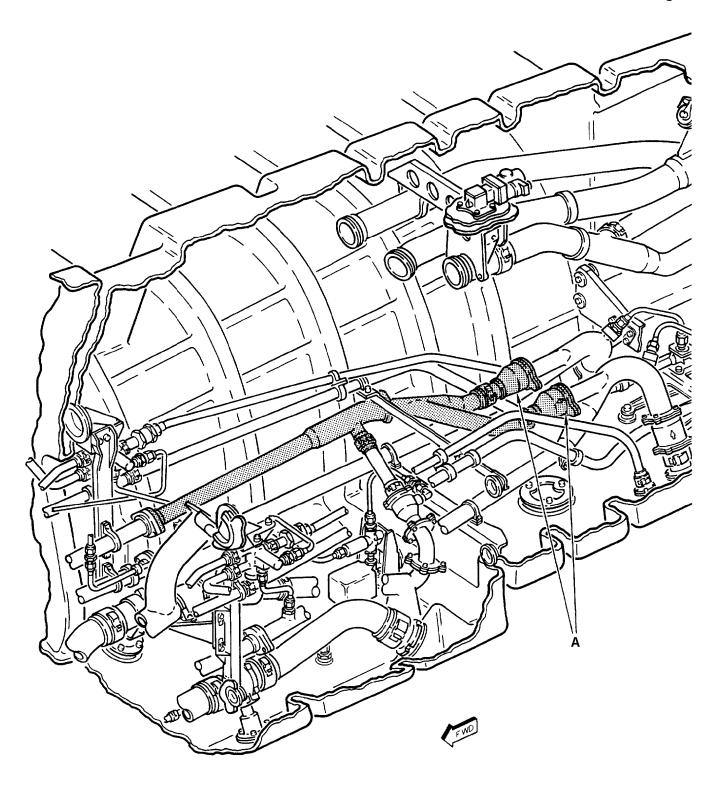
Engine Transfer Motive Flow Check Valve (5VAP563 or 5VAR564) (Sheet 1)
